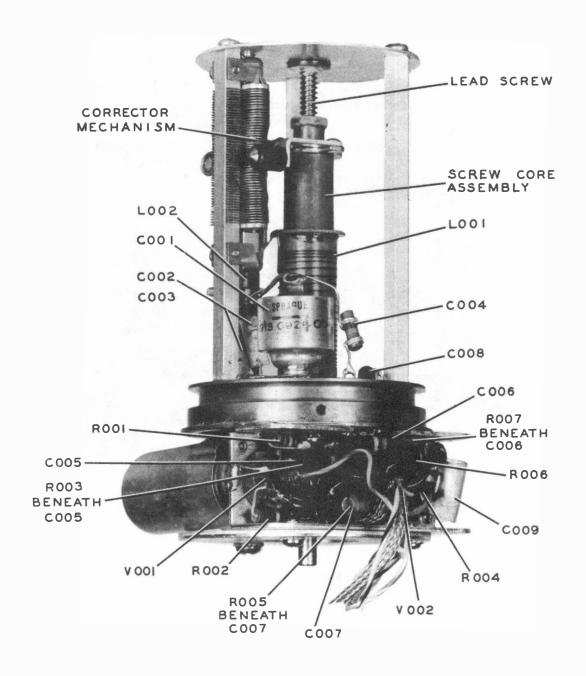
Variable Frequency Oscillator, Cover and Shield Removed
